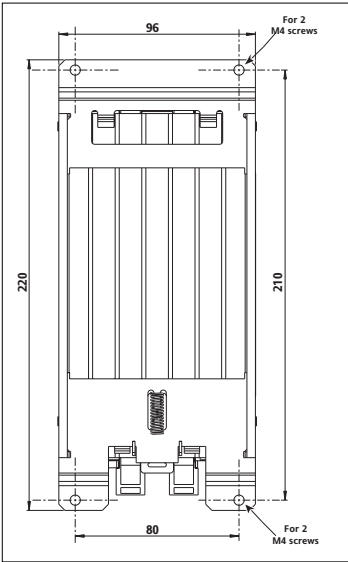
Bulkhead mounting - 16 A to 40 A units
